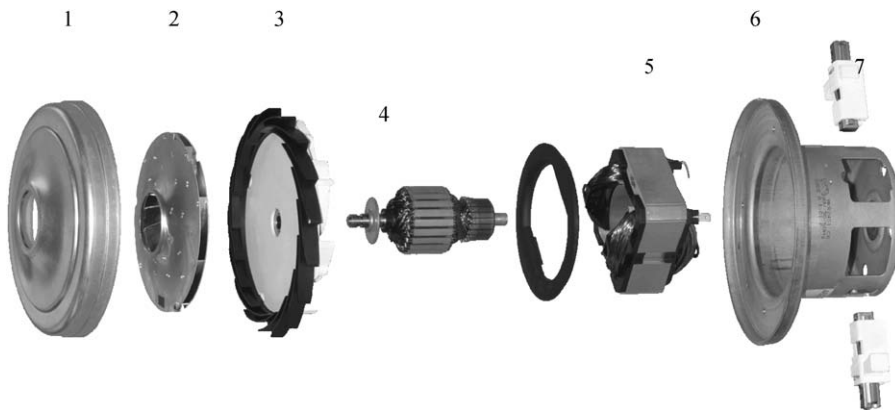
Structure of a vacuum cleaner motor; turbine cover (1), fan impeller (2), diffuser (3), rotor (4), stator (5), motor housing (6) and brush (7).
